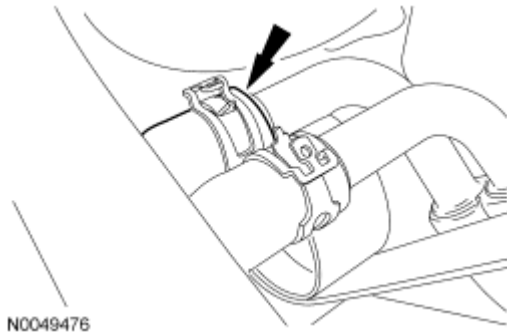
Disconnecting Coolant Hose From Charge Air Cooler (CAC)
